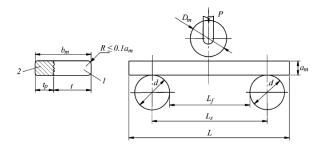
Specimen with cladding deposit for side-bend testing 1 - base metal, 2 - cladding deposit; $a_m = 10^{+0.1} \text{ mm is thickness of the specimen;}$ $b_m = t + t_p \leq 35 \text{ mm is width of the specimen (where t is thickness of the base metal;}$ $6 \leq t_p \leq 10 \text{ is thickness of the cladding deposit);}$
